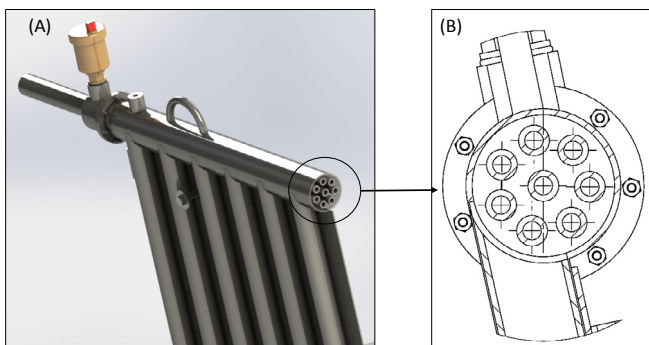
(A) 3D section view of the FHP. (B) Section view of the FHP condenser.
